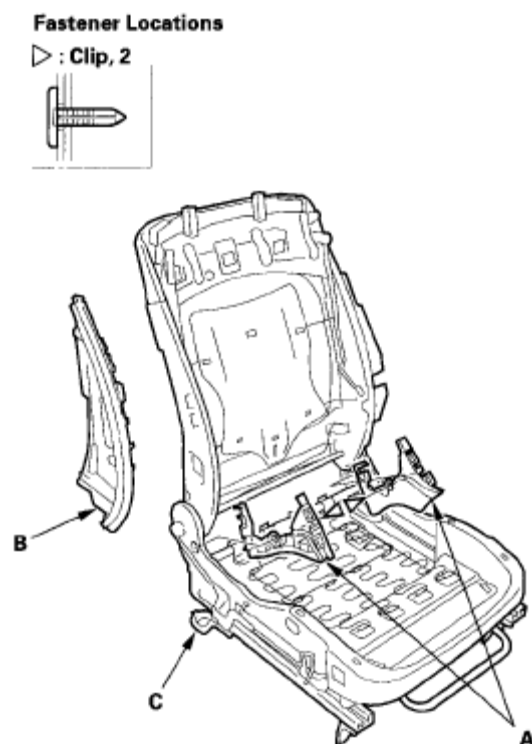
Removing Recline Inner Covers And Side Airbag Module Holder
